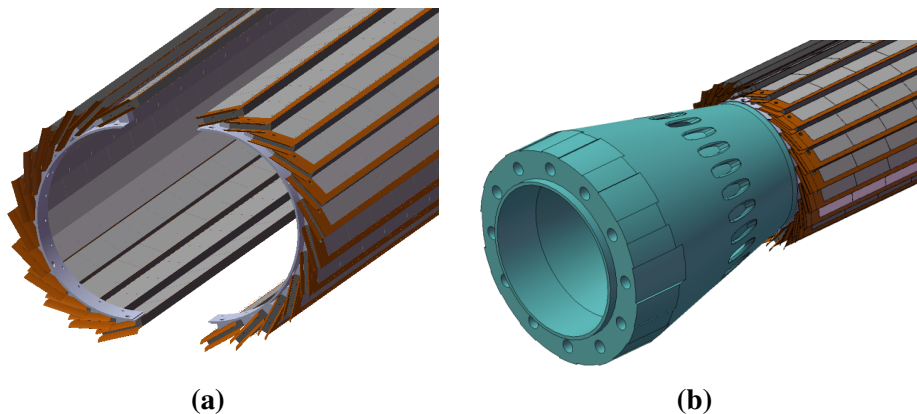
(a) The outer layer of the VTX barrel. (b) The outer layer of VTX assembled on the beam pipe
